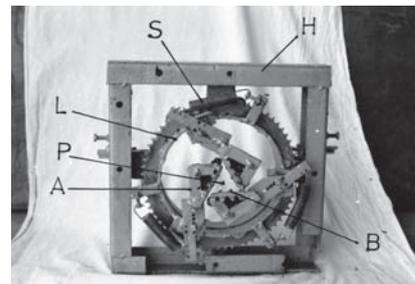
The peeling chamber. A - Peeler arm, B - Peeler blade, H - Peeler ring housing, S - Spring, L - Peeler ling
